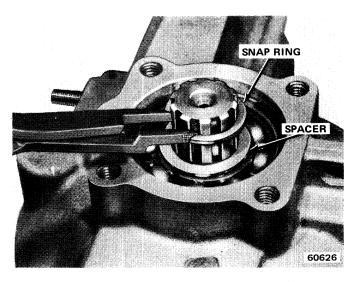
Removing-Installing Main Shaft Snap Ring
